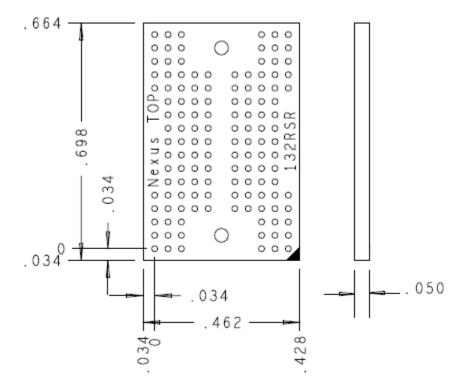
132 Ball Riser Mechanical Dimensions (sold separately)
